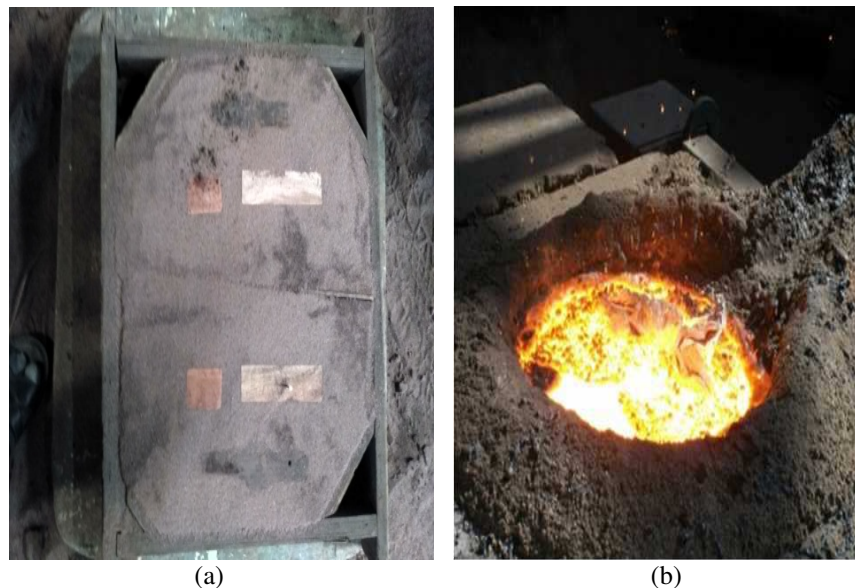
(a) Sand Mould (b) Induction Furnace with Molten Metal.
